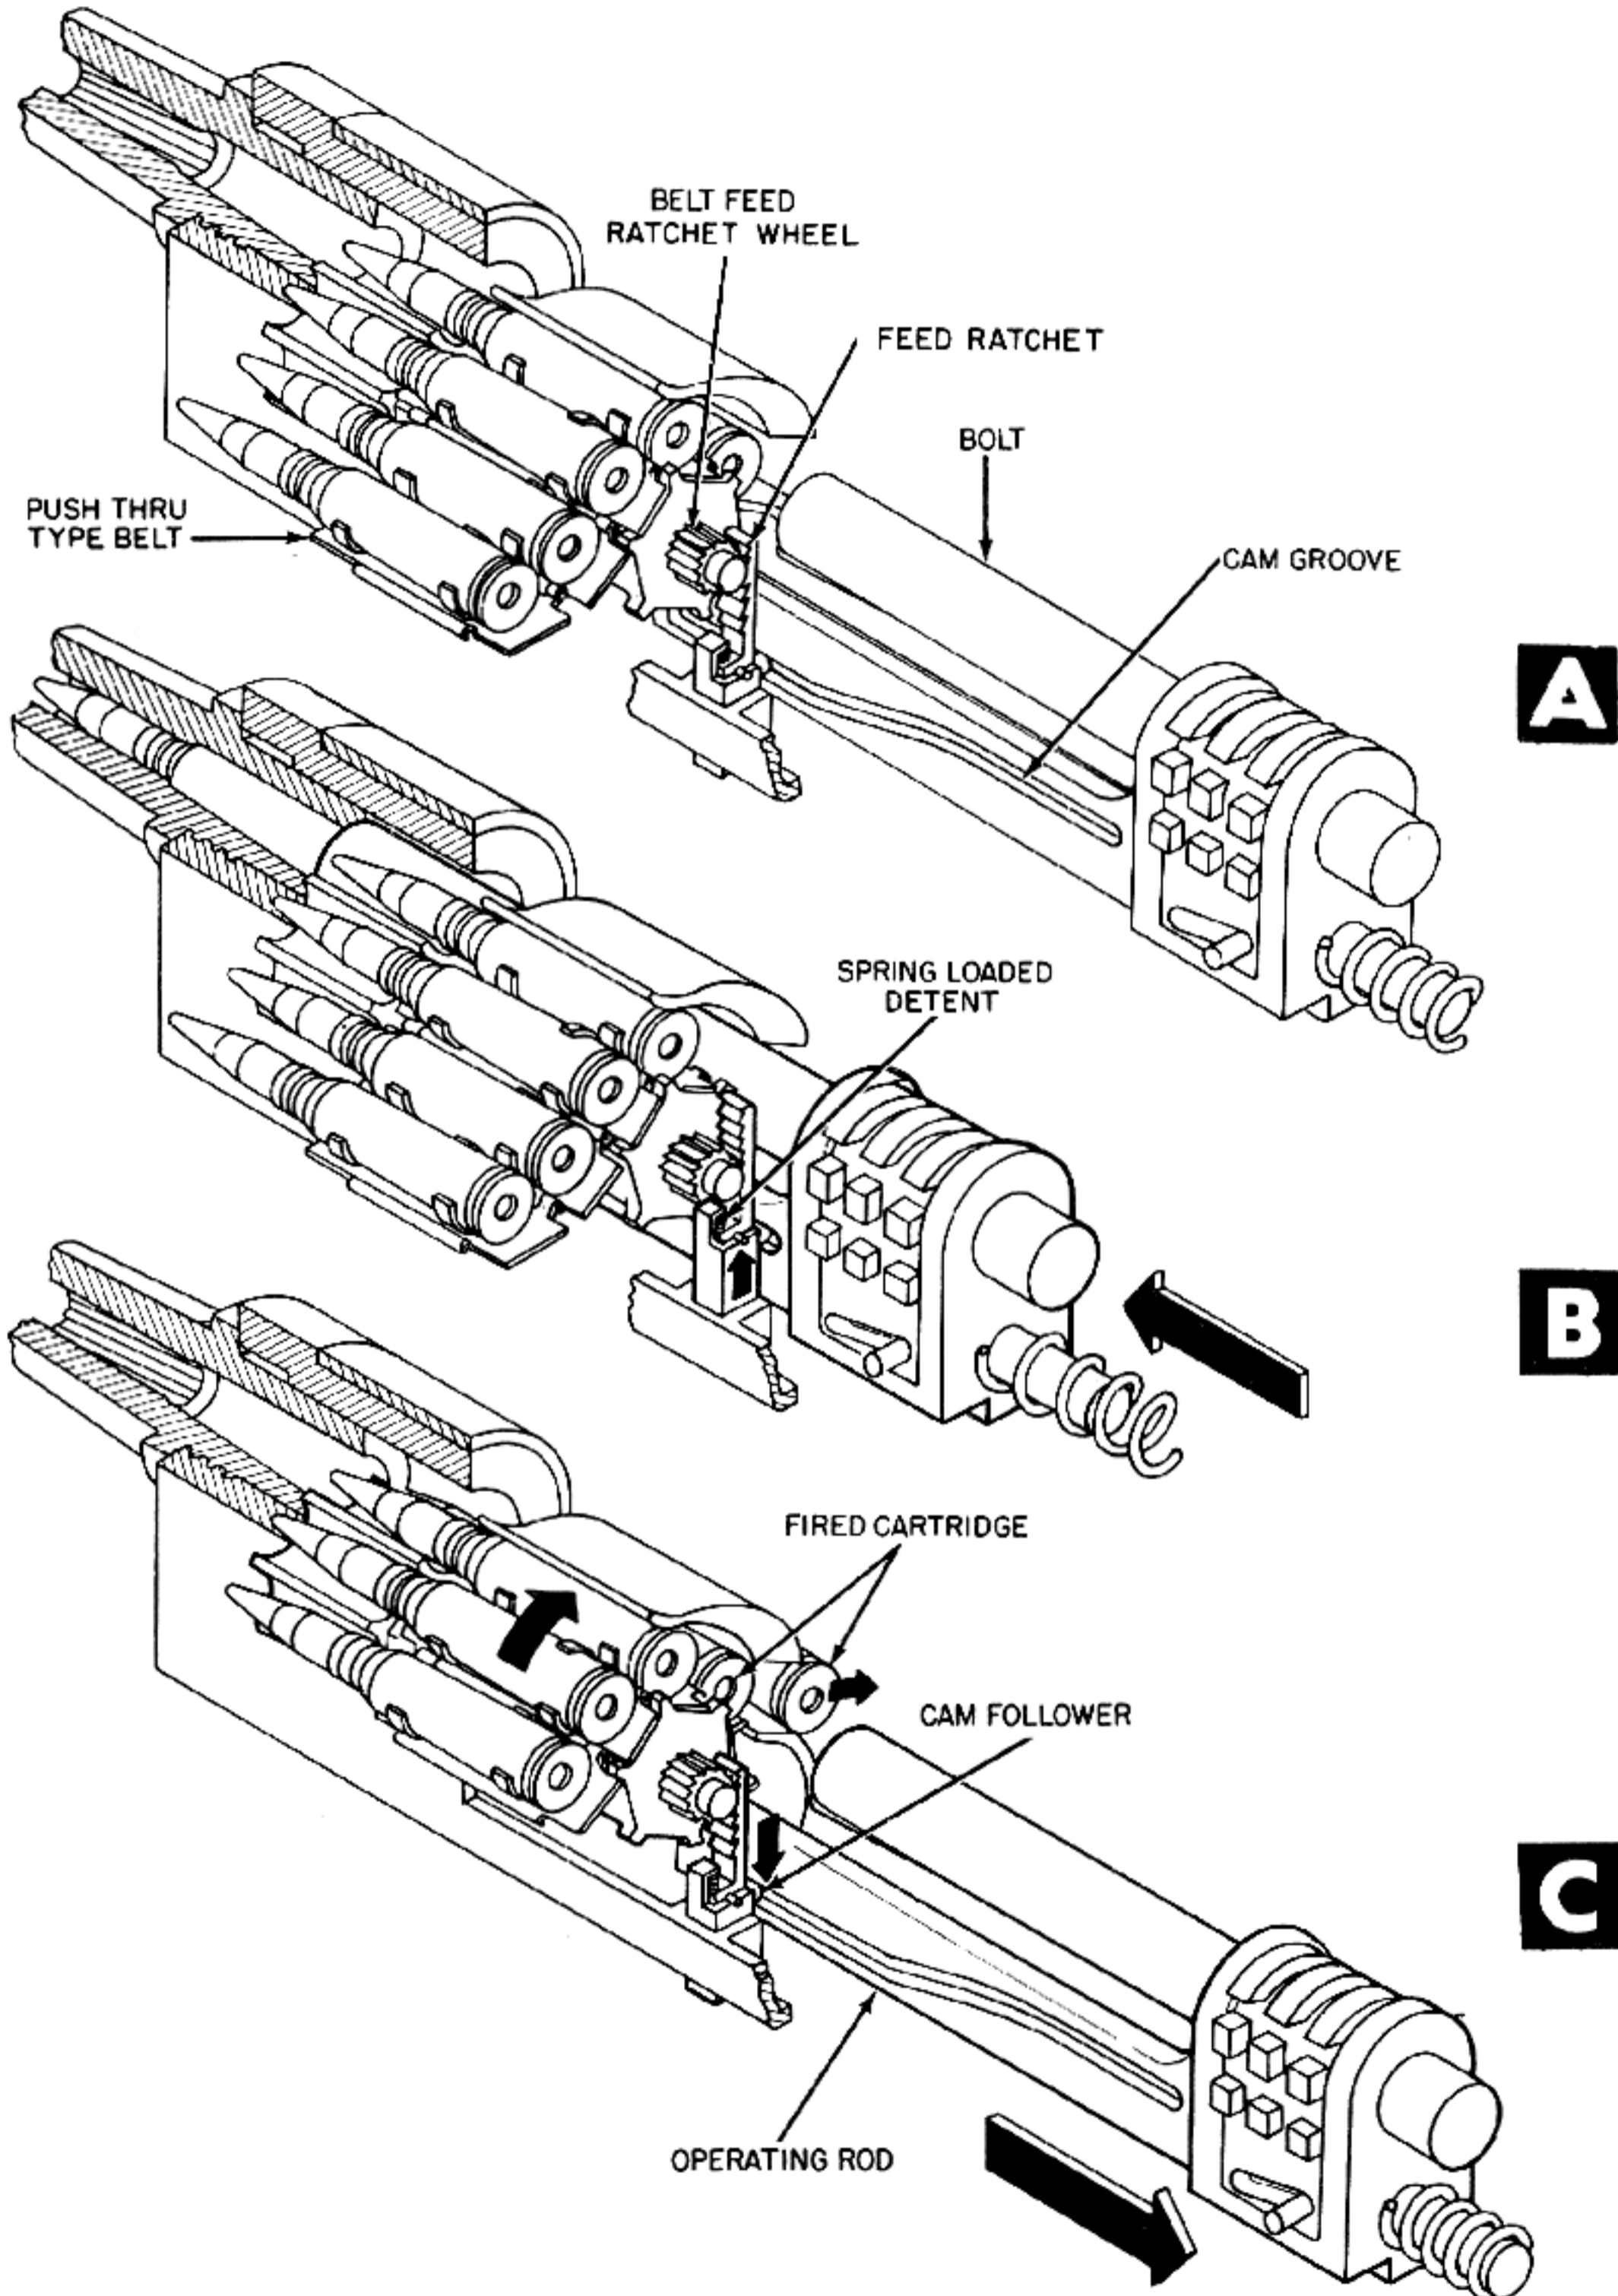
Cam Groove in Operating Rod Actuates Feed Sprocket Ratchet.
